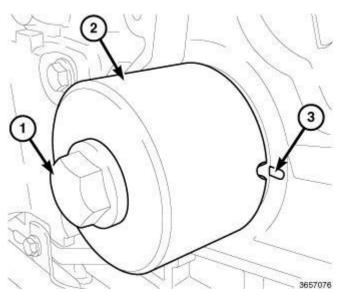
Front Crankshaft Oil Seal Courtesy of CHRYSLER LLC
